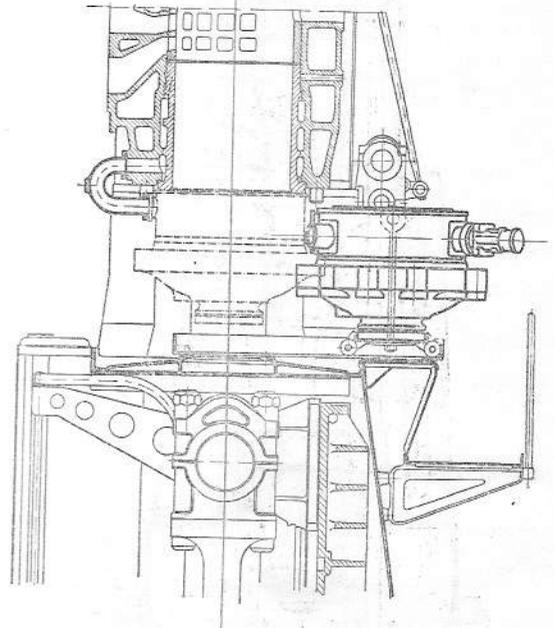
M.A.N. Double-acting Two-stroke Cycle Diesel Engine—Construction of Lower-cylinder Cover.
